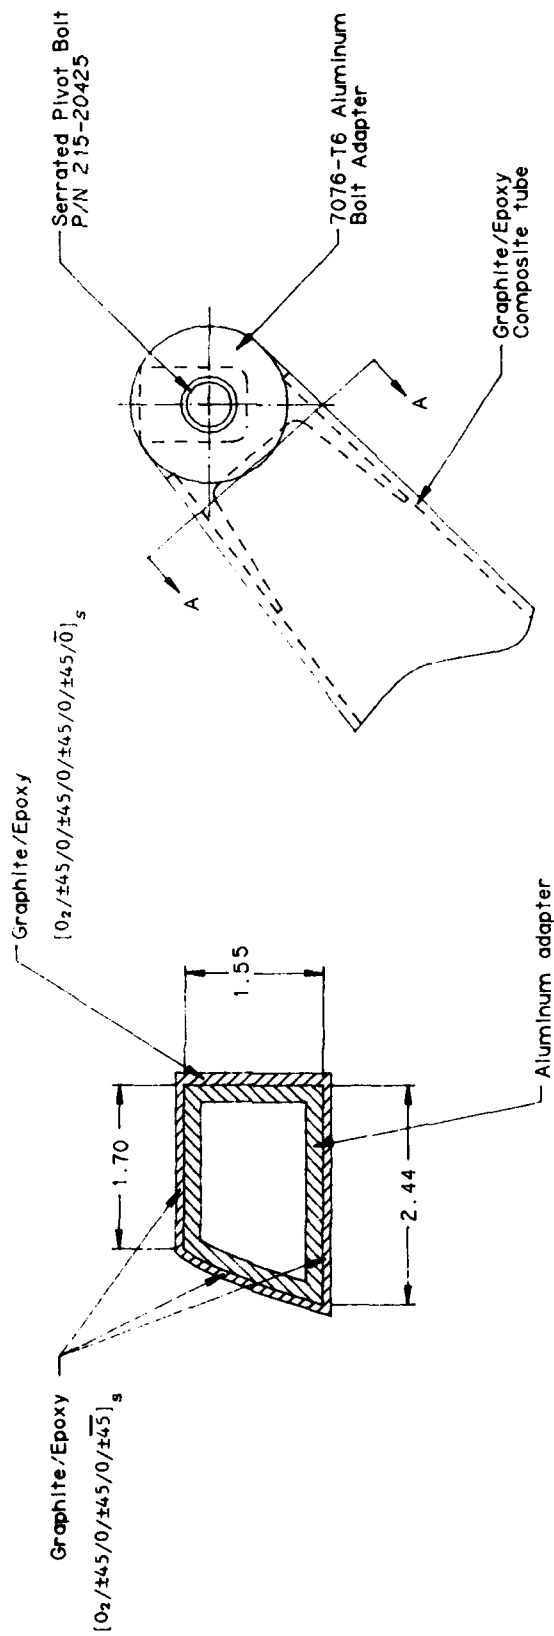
Serrated Pivot Bolt Adapter Joint.
